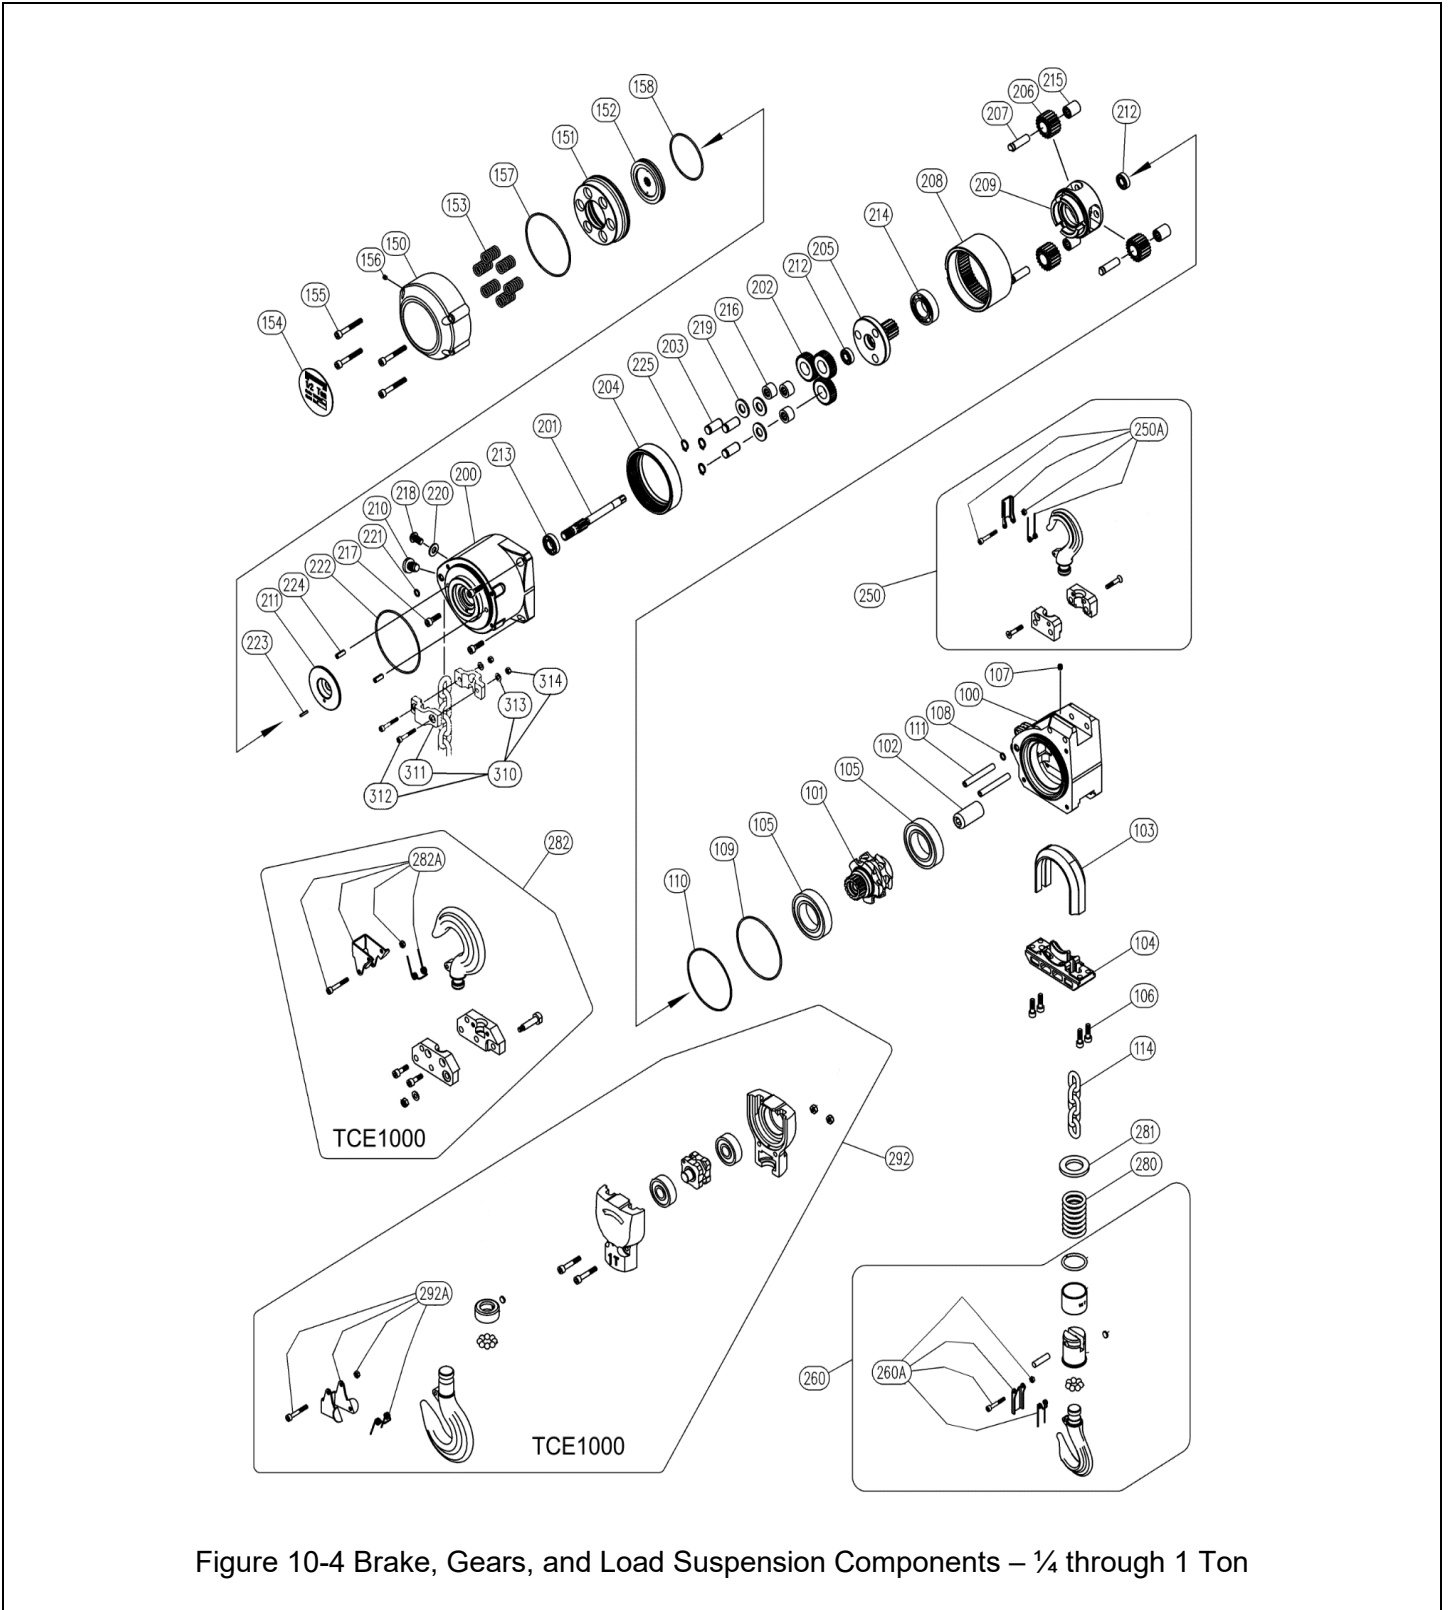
Brake, Gears, and Load Suspension Components – ¼ through 1 Ton
